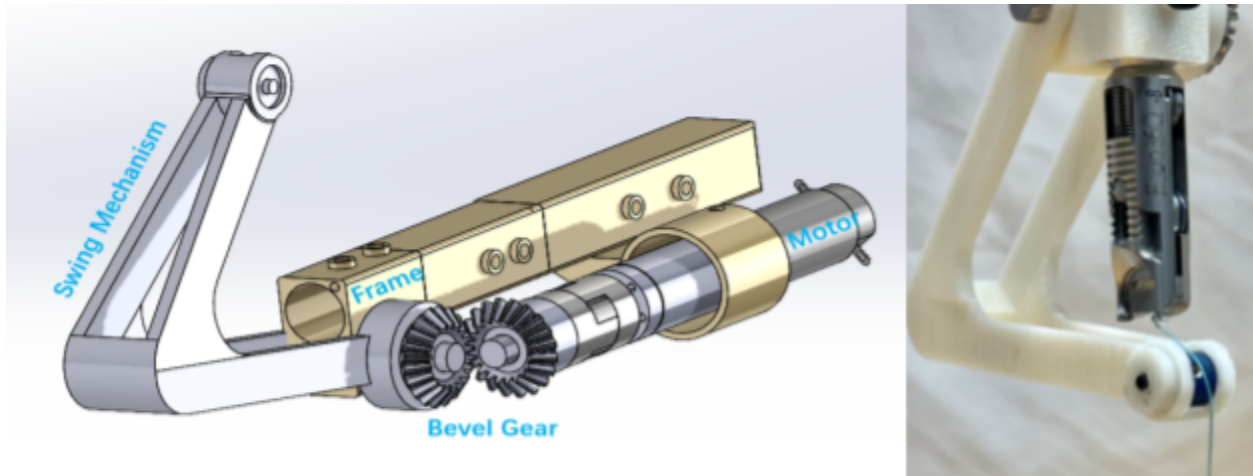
(Left) Large swing mechanism CAD model. 1b (right) Large swing mechanism mounted on the STAR robot.
